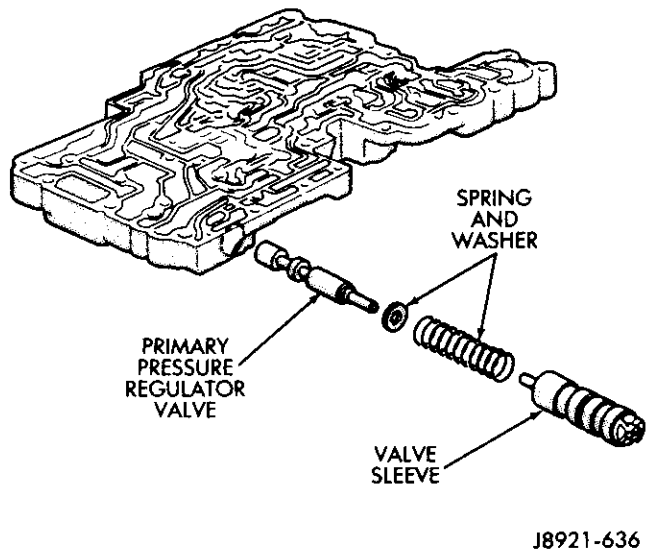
Removing/Installing Primary Pressure Regulator Valve
